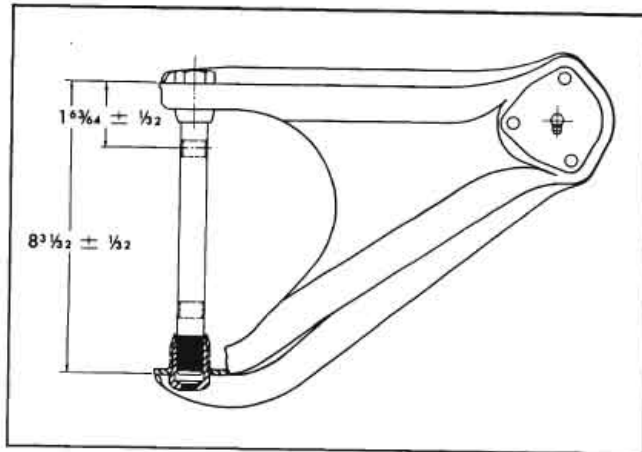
Correct Installation of Upper Control Arm Shaft
